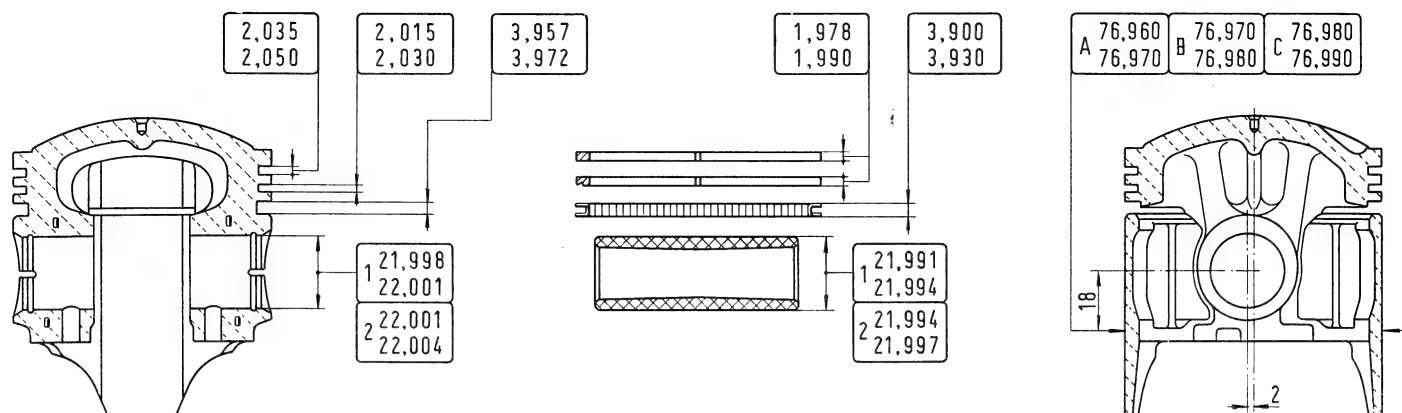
Critical dimensions of pistons, piston pins and rings to suit engine 115 C.005 (in mm).
